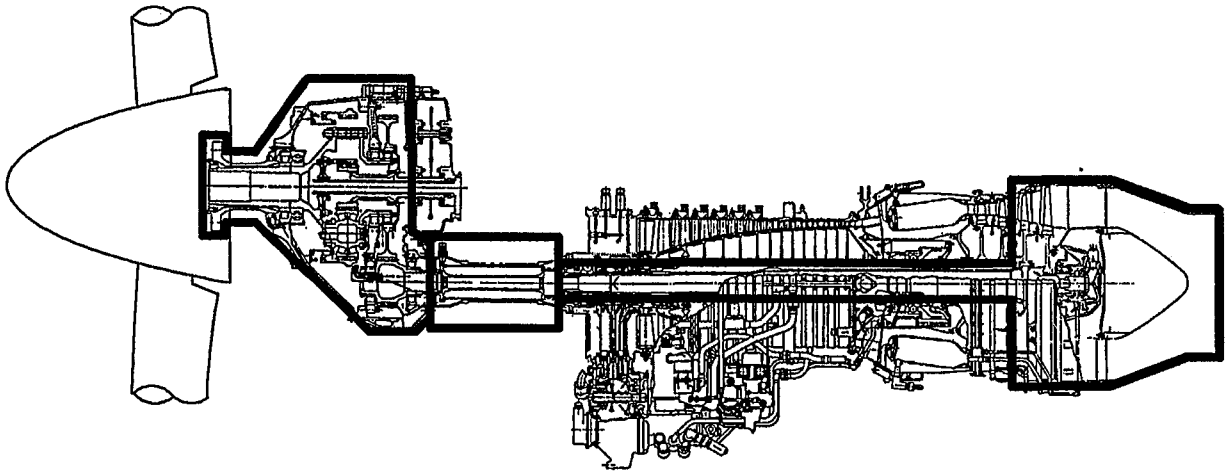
Power turbine – torque meter – PGB (Propeller Gear Box).
